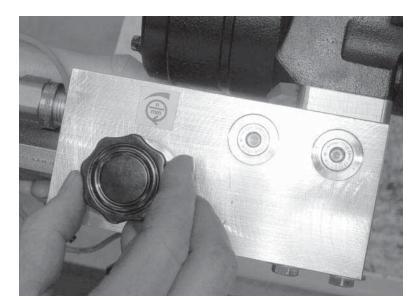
Use the speed dial on the hydraulic manifold to adjust the machine rotation speed.
